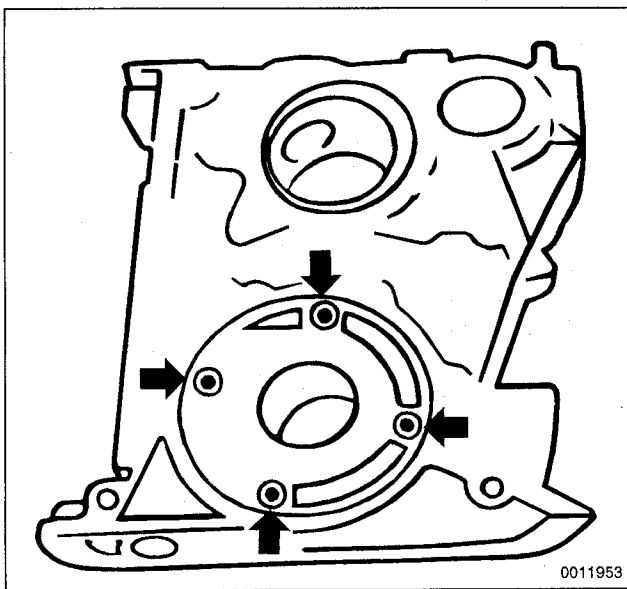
Oil pump cover mounting bolts (arrows) on M44 engine.
